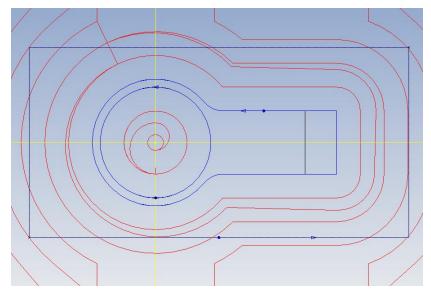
Bottom Collar ESPRIT File for Milling Machine
